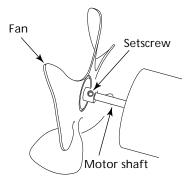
Fan, Motor Shaft, and Setscrew Location
